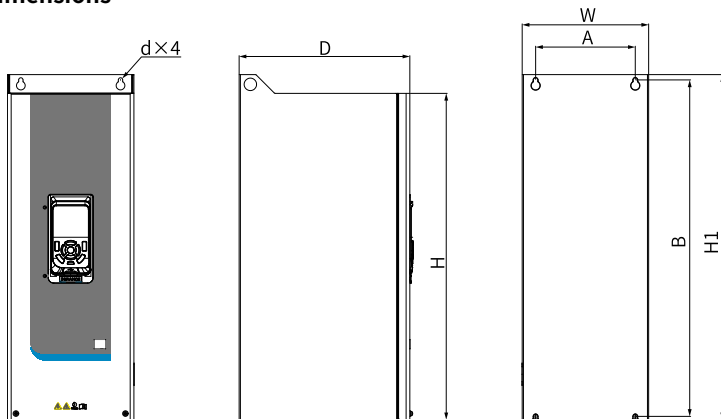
Outline dimensions and mounting dimensions of S5 models
